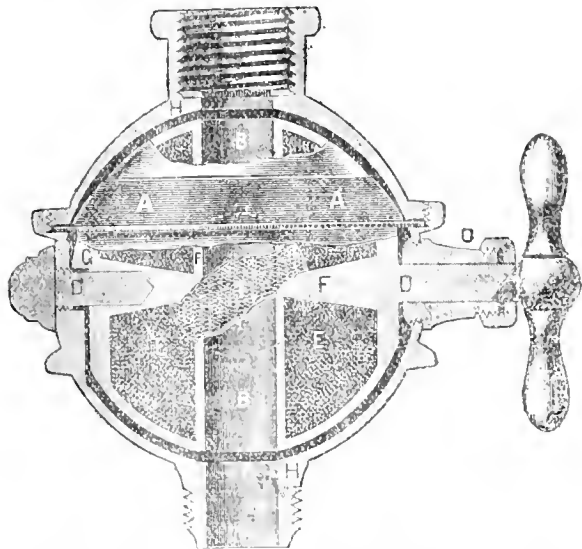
Sectional view of "The Grant Revolving Ball Filter." AA, patent cup and joint washer, packed by pressure of water; BB, direct way for water through ball without filtering; C, packed handle to revolve ball; DD, bearings upon which ball revolves; EE, animal bone, charcoal, or filtering medium; FF, bars inside of ball upon which the water strikes when filtering, preventing drilling of charcoal; HH, shell containing ball; I, section of wire screen or sieve which holds charcoal into the ball, and through which water passes when filtering.
